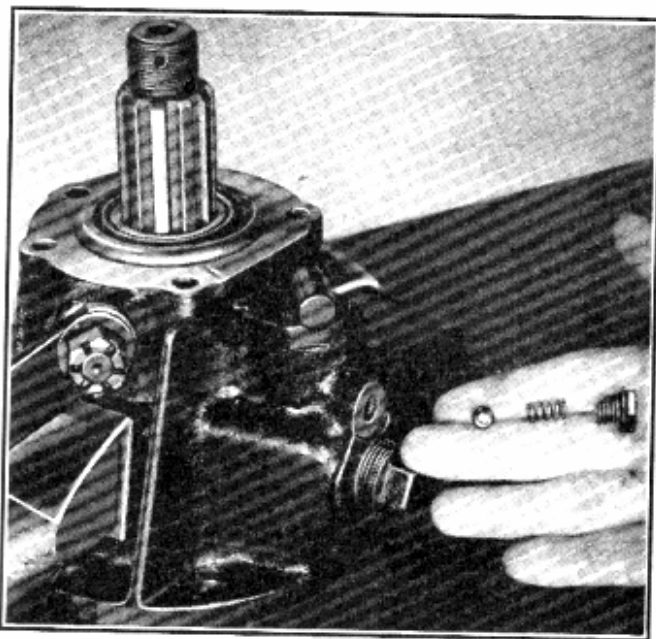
Poppet Ball, Spring, Washer and Screw are Installed in Declutching Carrier in Order Shown
